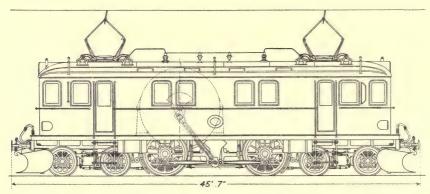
Swedish State Railway. Crank and Side Rod Passenger Locomotive. 18,000-volt, 15-cycle, single-phase 1000-h. p. unit.
